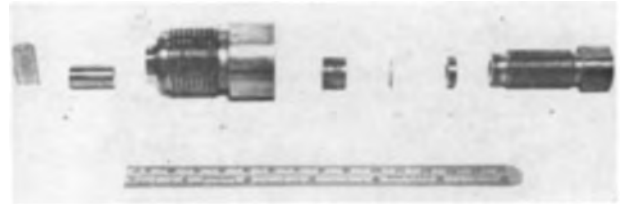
Specimen and rupture-disk assembly. A—Vent-plug specimen; B—assembly body; C—choke; D—disk; E—retaining ring; F—retainer plug.
